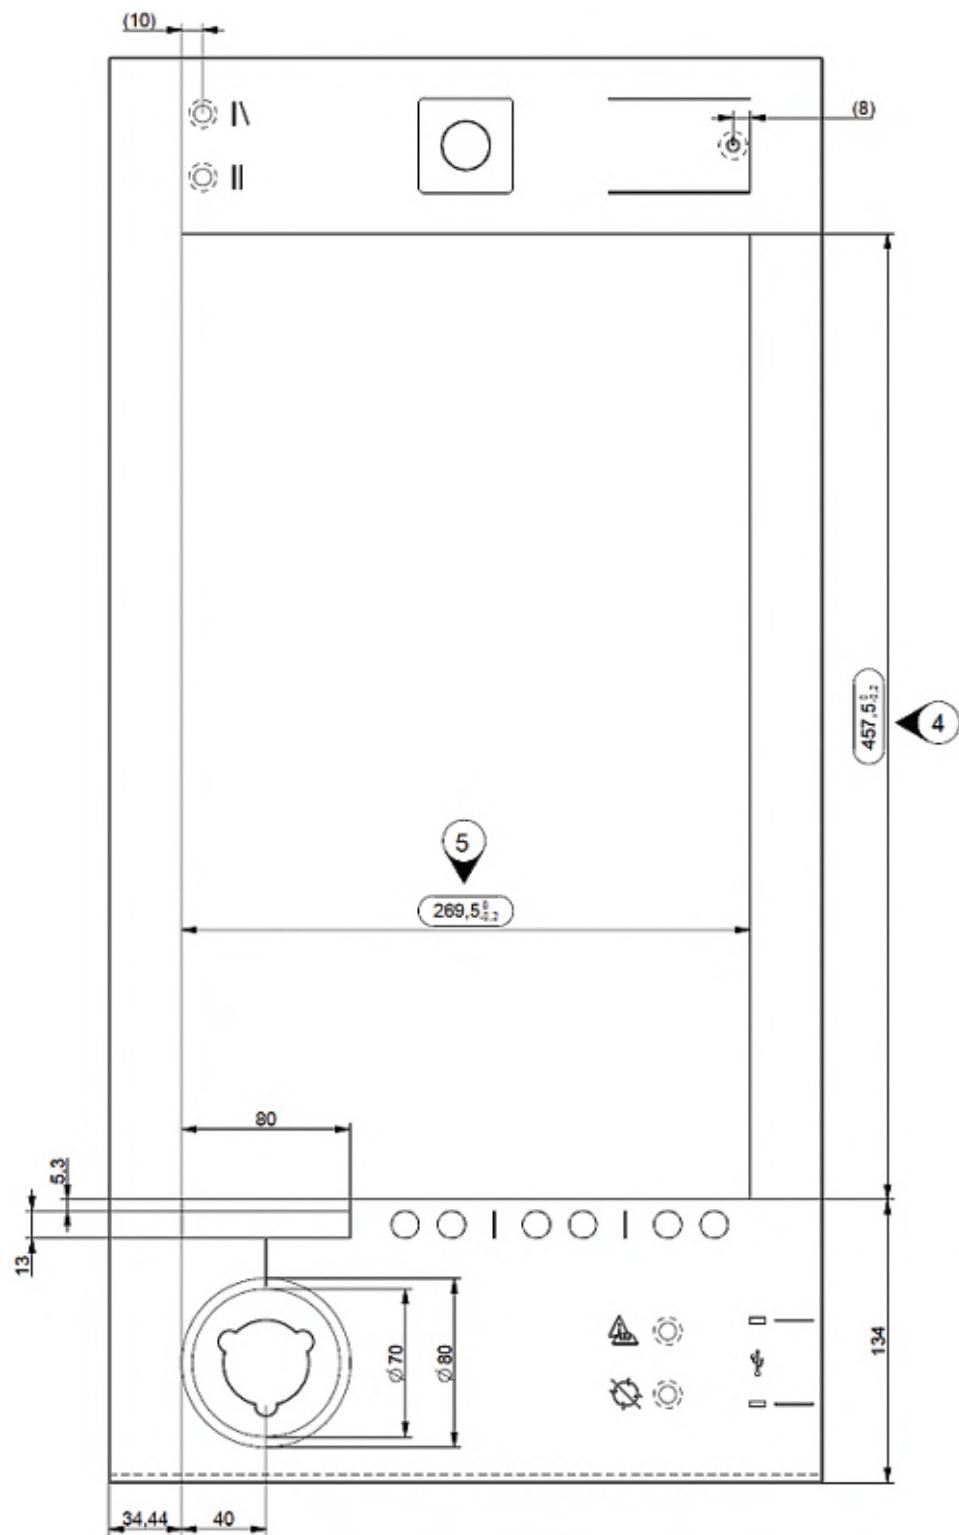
Dimensioned view of the CC300 glass front (print side - reversed image)
